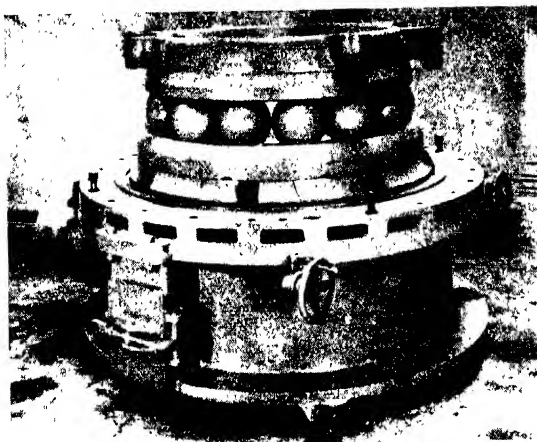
GRINDING ELEMENT OF MILL, SHOWING PYRITIS TRAP DOOR (*Babcock & Wilcox, Ltd.*)
